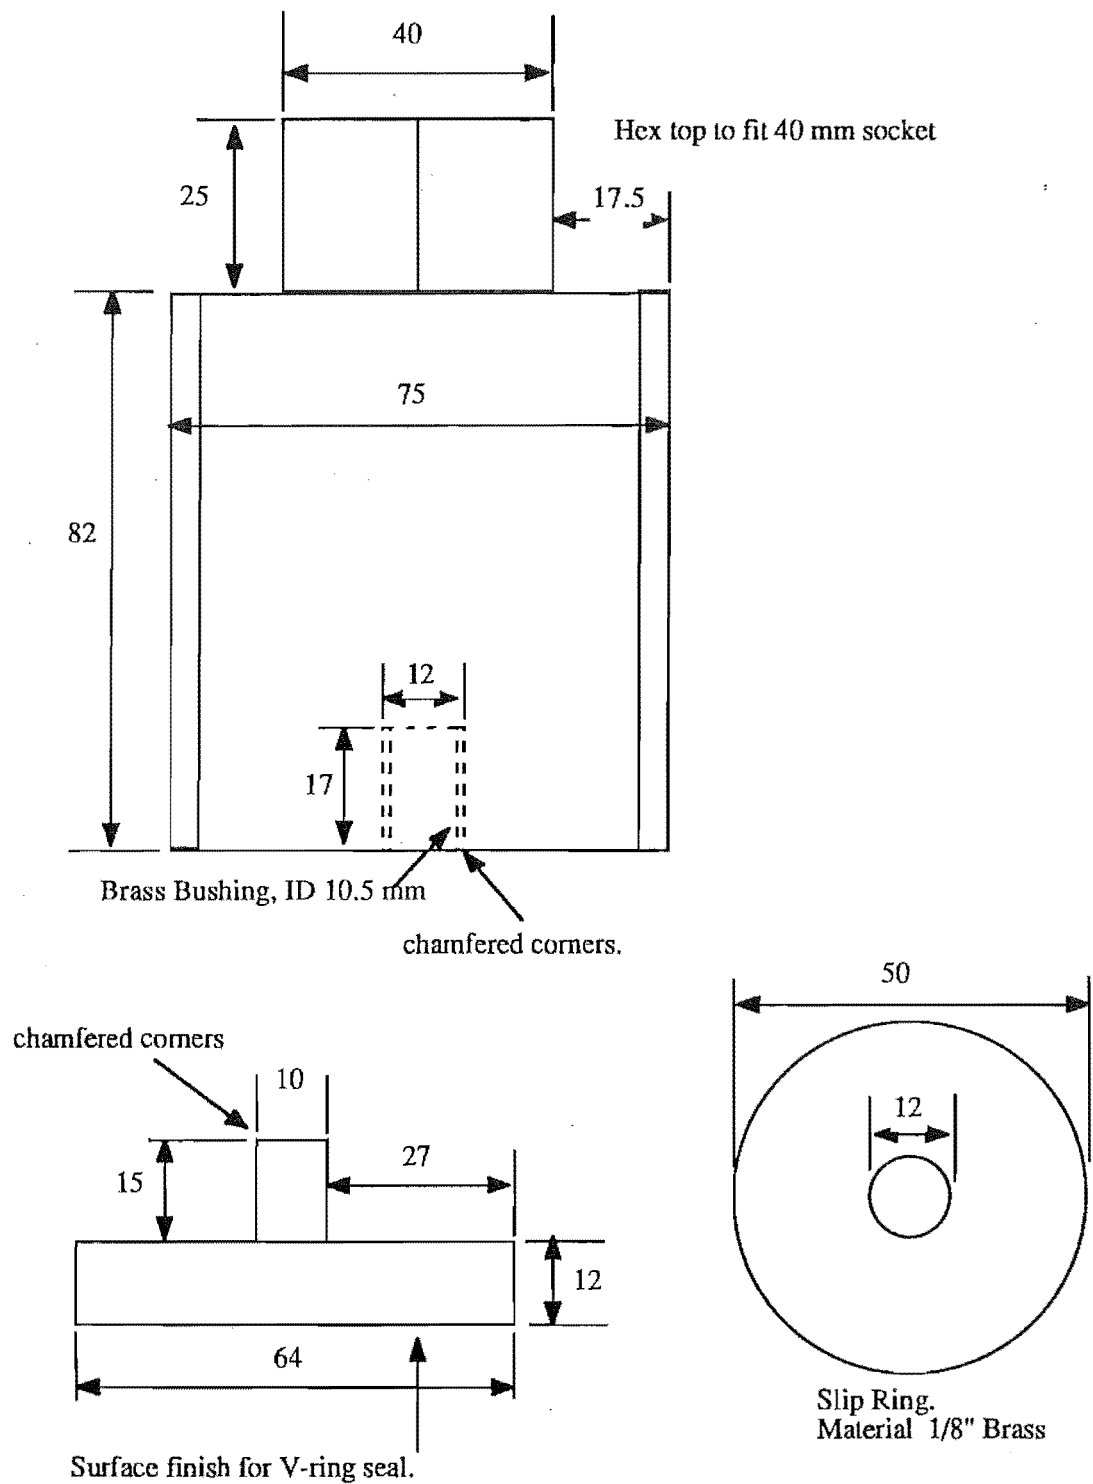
Workshop Drawing of the 700 Bar Cell Plug and Seal Details
